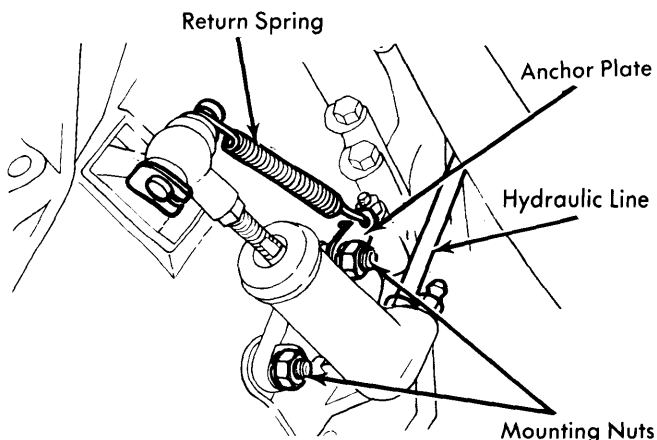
Installed View of Clutch Slave Cylinder Showing Mounting Nuts
